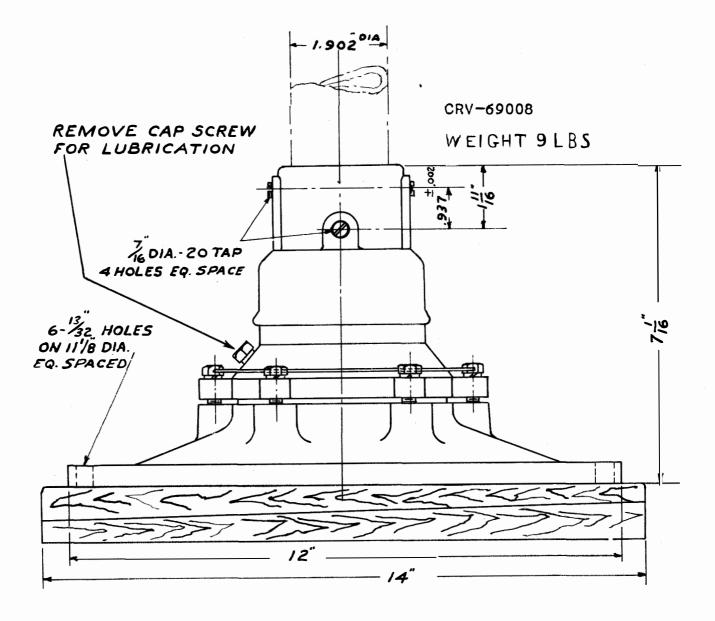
Deck Bearing (Outline Diagram KX-280906—Sub 3)
